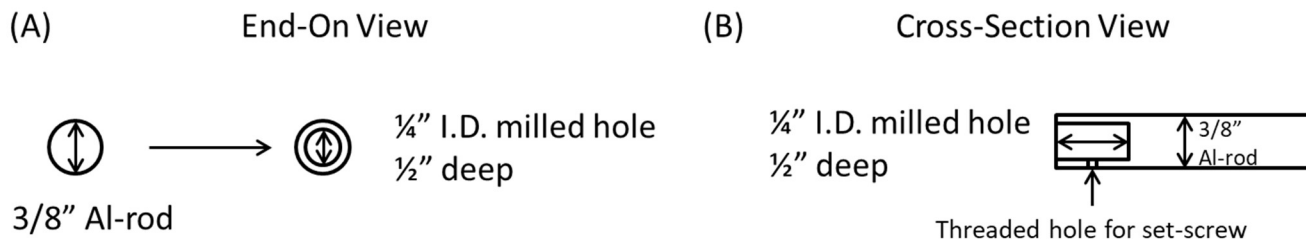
Aluminum rod milling schematics showing (A) end-on view for motor drive shaft and (B) cross section for situating the setscrew to hold the rod to the drive shaft of the motor. All dimensions are in inches where 1 in. is equivalent to 2.54 cm.
